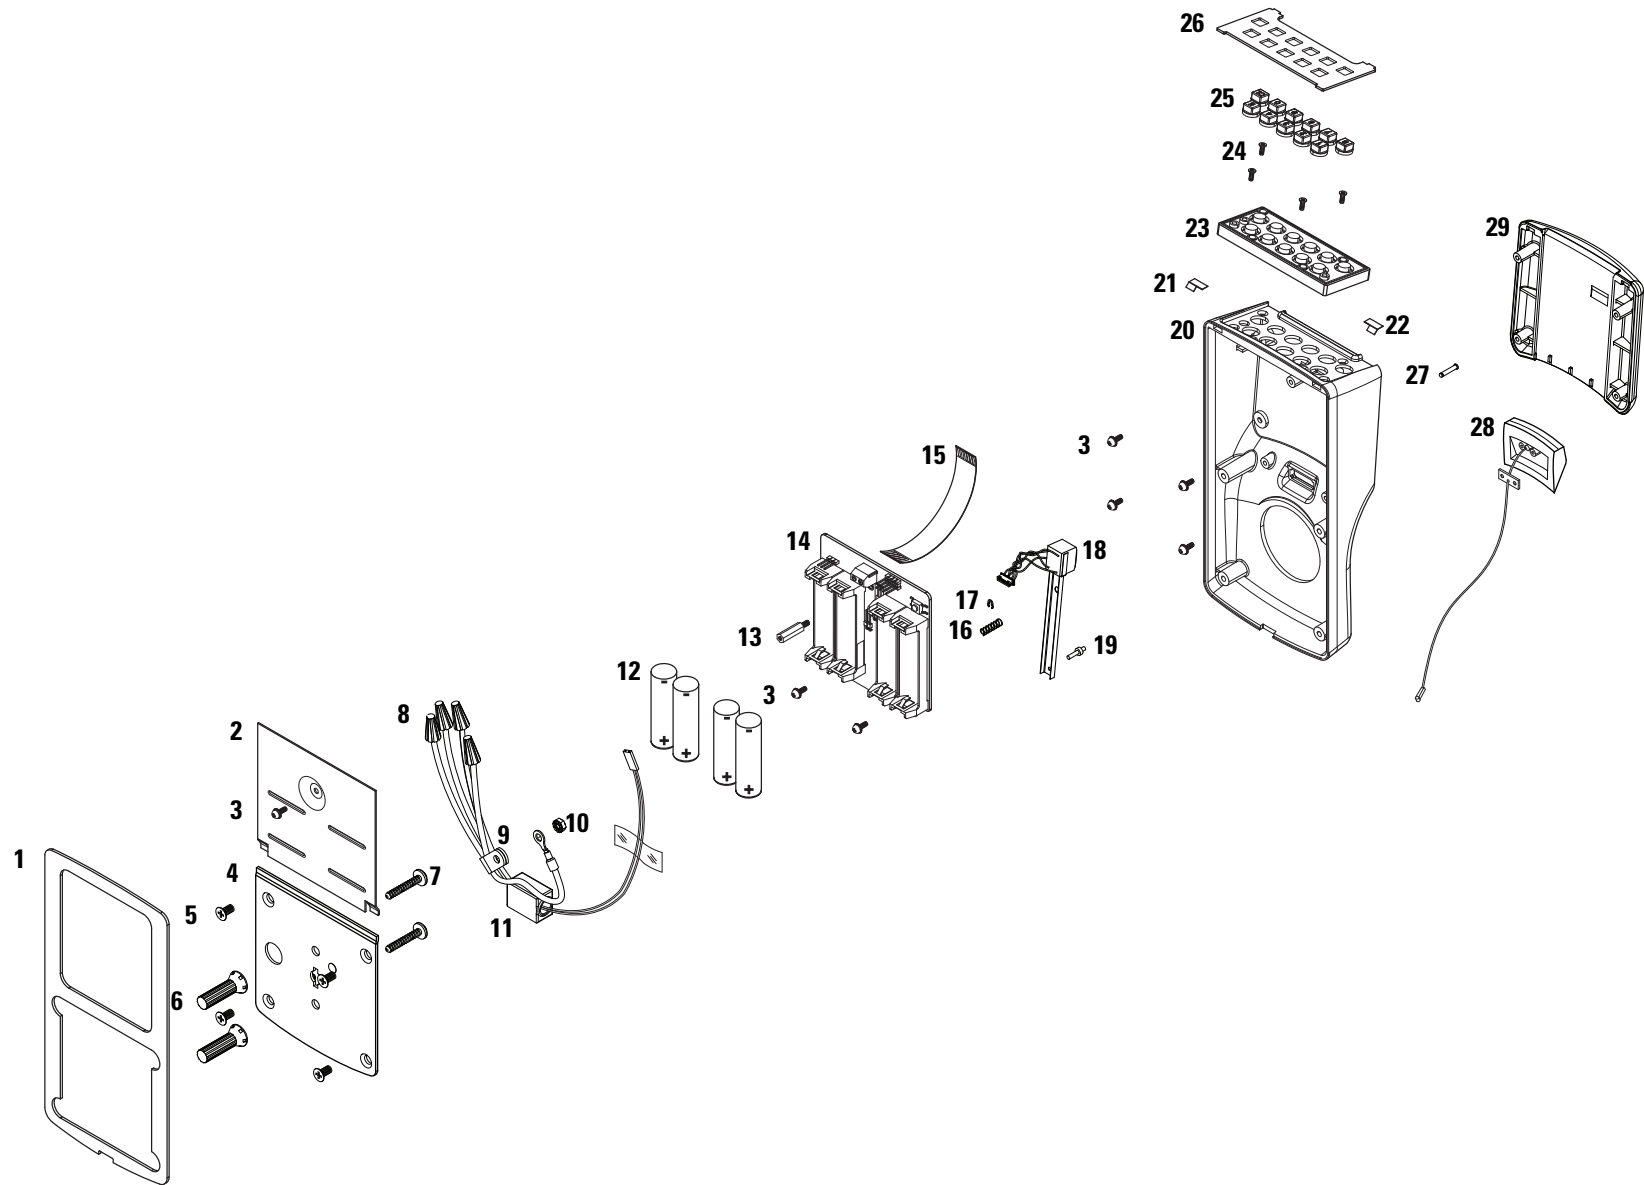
Dual validation reader (keypad and magnetic stripe) escutcheon assembly (WAMS shown)
